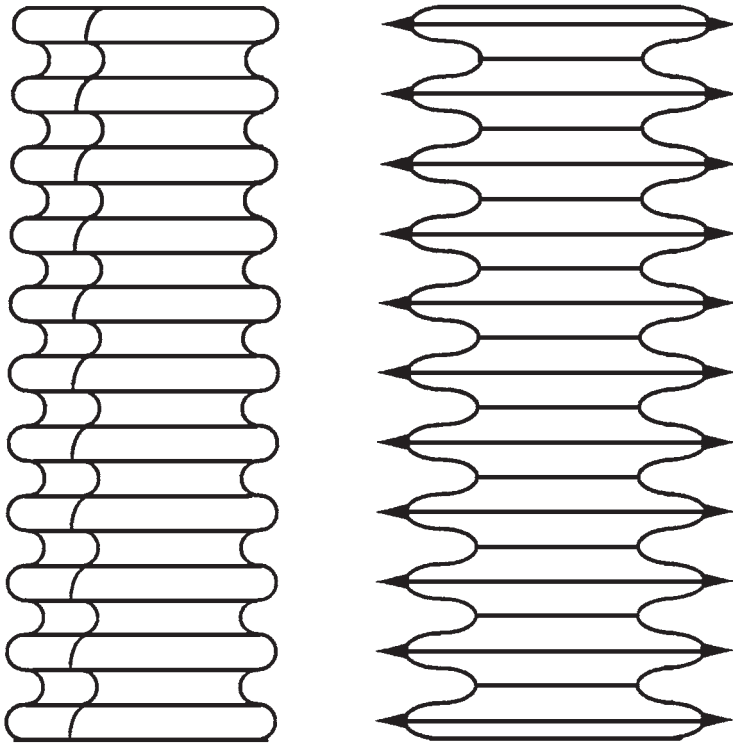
Hydroformed (left) and welded bellows. (Courtesy of Kammer USA)
